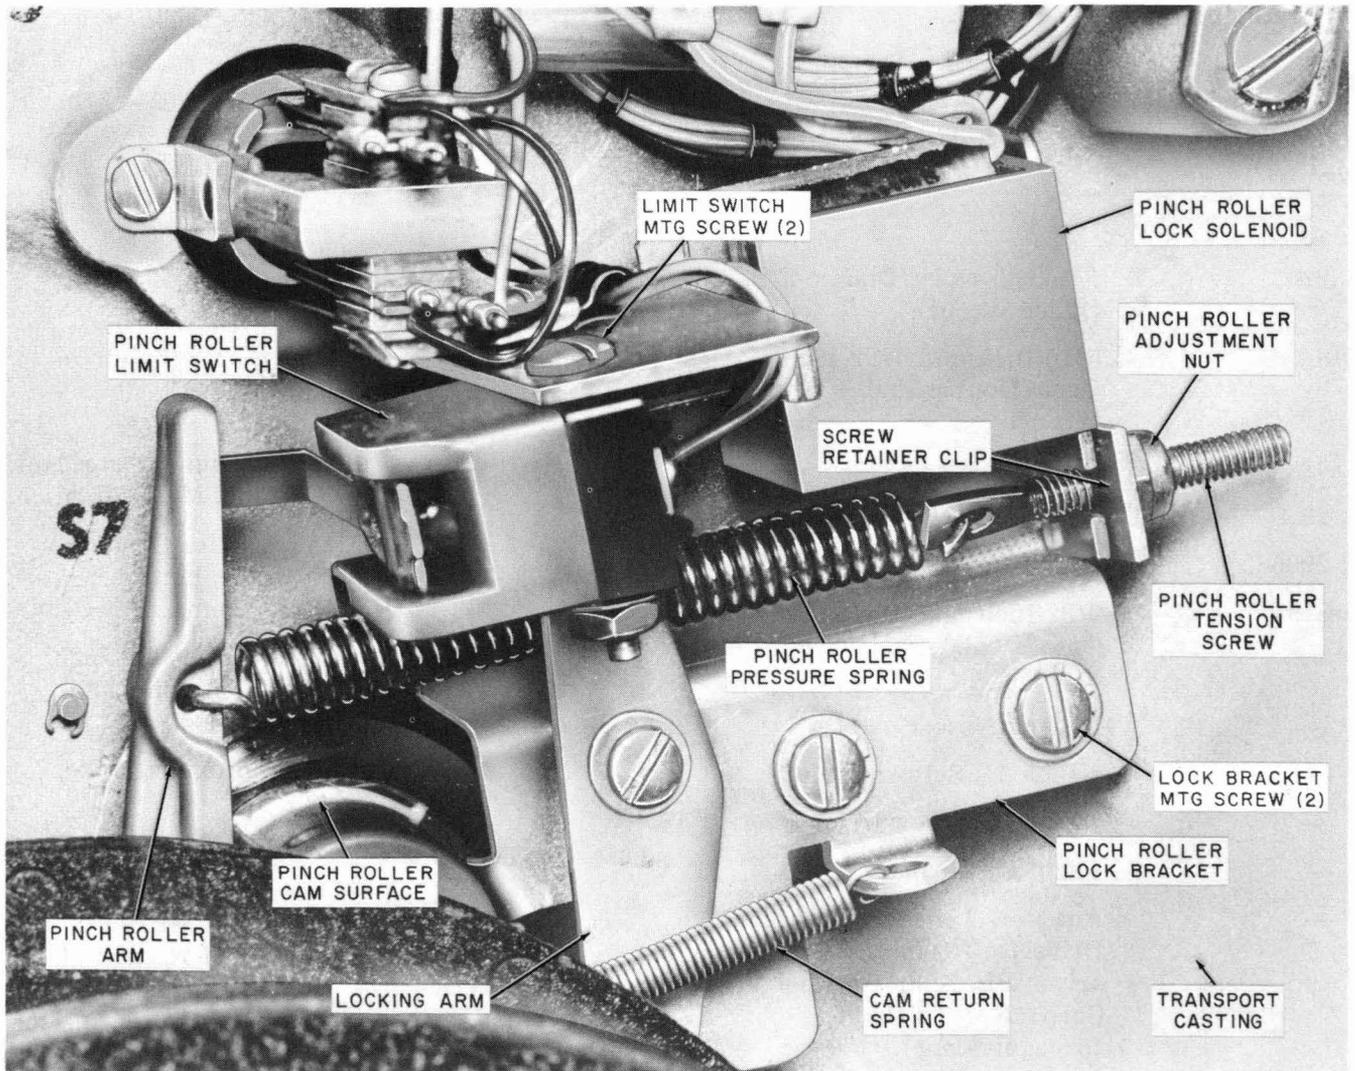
Pinch Roller Limit Switch, Lock Solenoid, and Associated Parts
